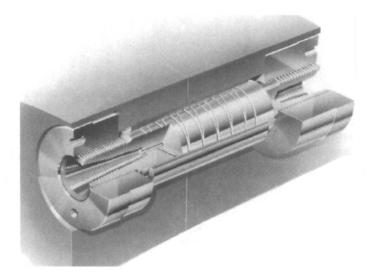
The radial-fit bolt fully assembled in the turbine flanges, showing the taper barrel, and the oilways that enable hydraulic pressure to force bolt and sleeve apart.
